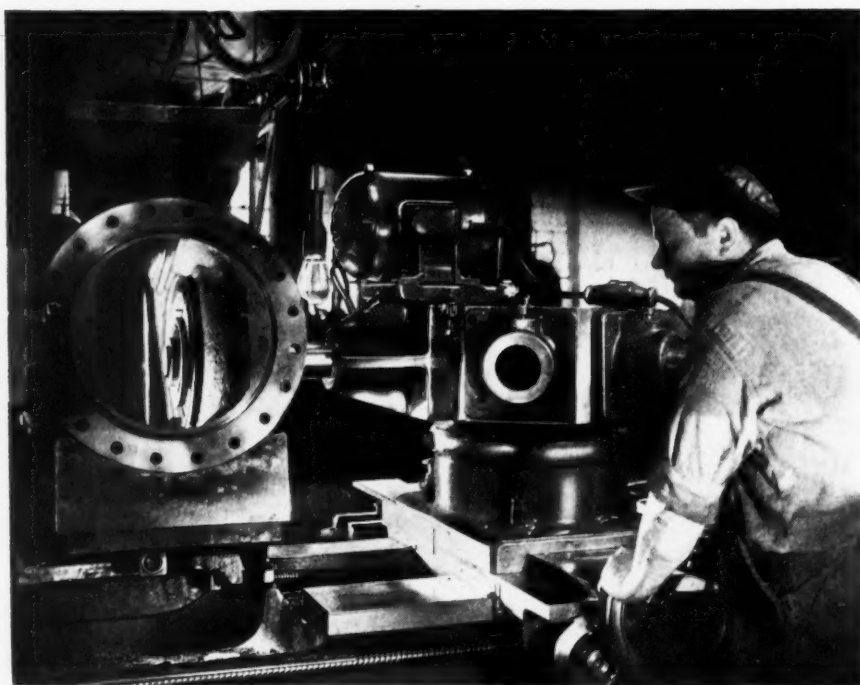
The Flat Stellite Seats of Wedge Gate Valves are Also Ground in a Turret Lathe by Employing the Front and Back Sides of a Grinding Wheel Mounted on the Turret
